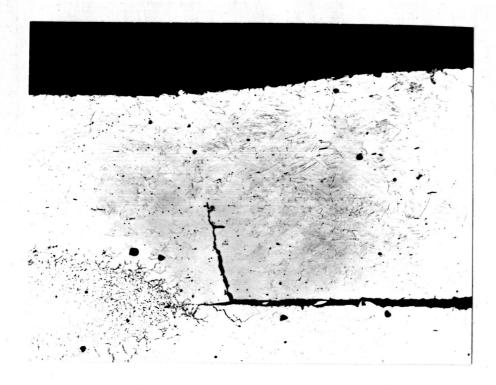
Same spot weld as above except at a higher magnification to show the fatigue crack in greater detail. The crack length is 0.006% or 65% thru the sheet thickness.
